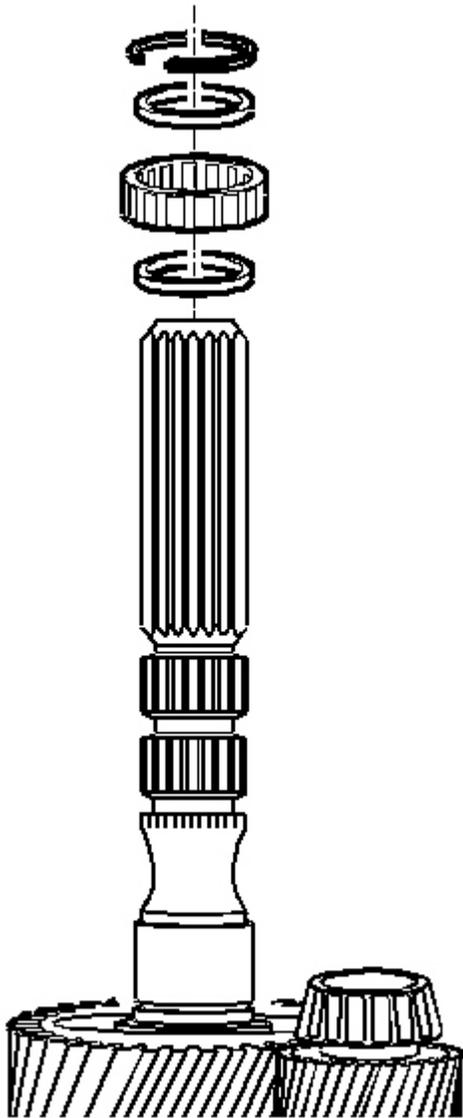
View Of Mainshaft Rear Roller Bearing, Rear Bearing Retainer Ring & Spacers
